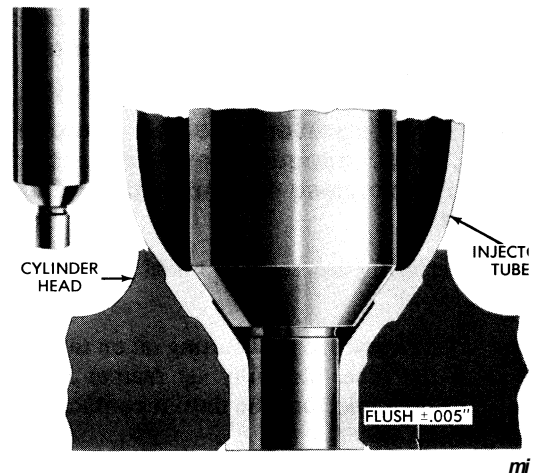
Injector Tube Bevel Seat to Cylinder Head Limits - Gage J 25561
